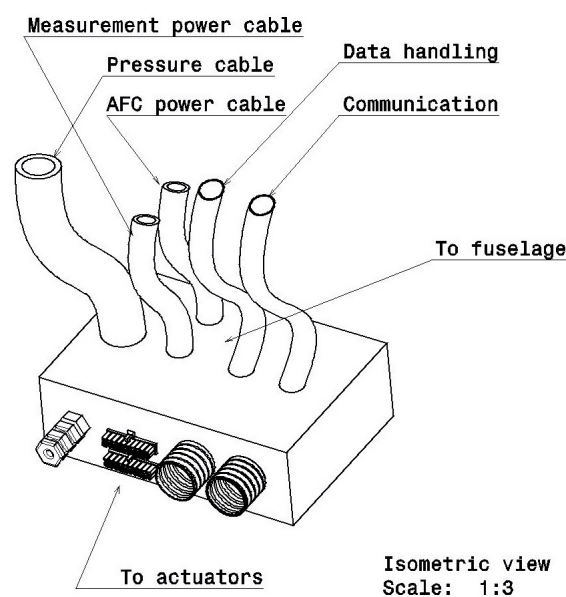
An example of a cable dock. This dock will be attached to a rib, right under the lowered skin. Through holes in the skin, the cables will be lead to the actuators
